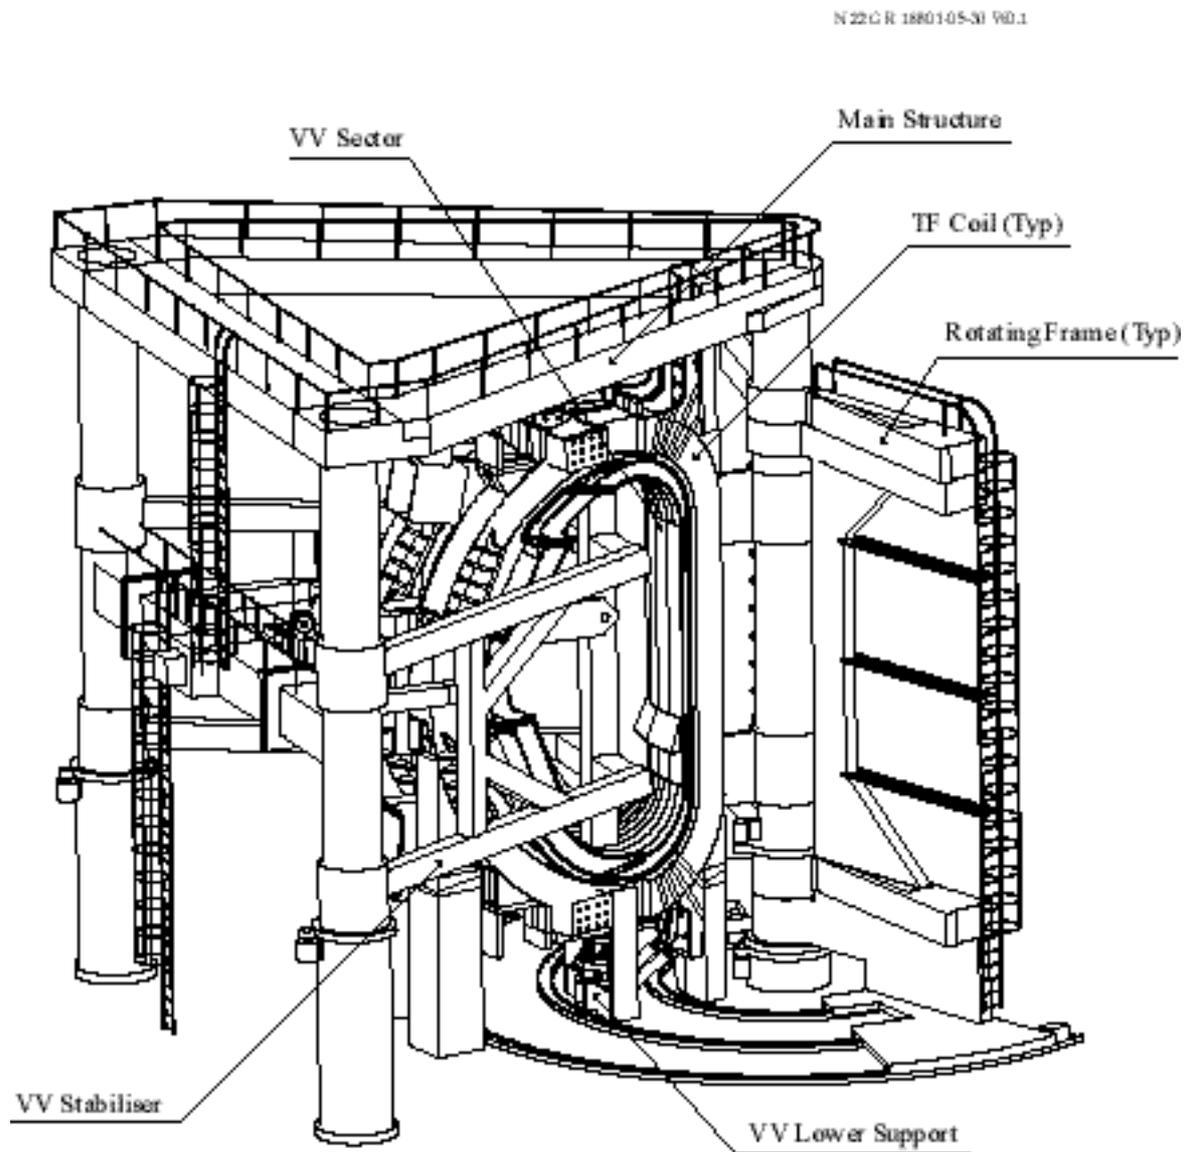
Sector Sub-Assembly Tool (2.2.B.03.03)
